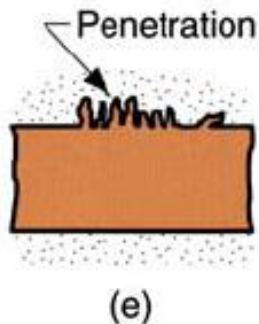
Common defects in sand castings: (e) penetration
